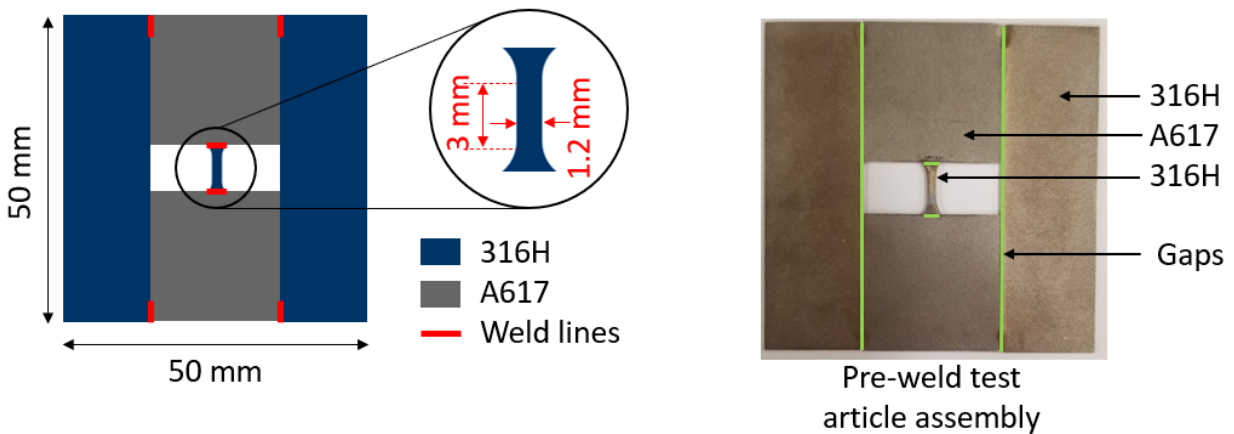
Version 1 of the WFSTA design shows the dimensions and geometry with different materials and pre-weld test article assembly.
